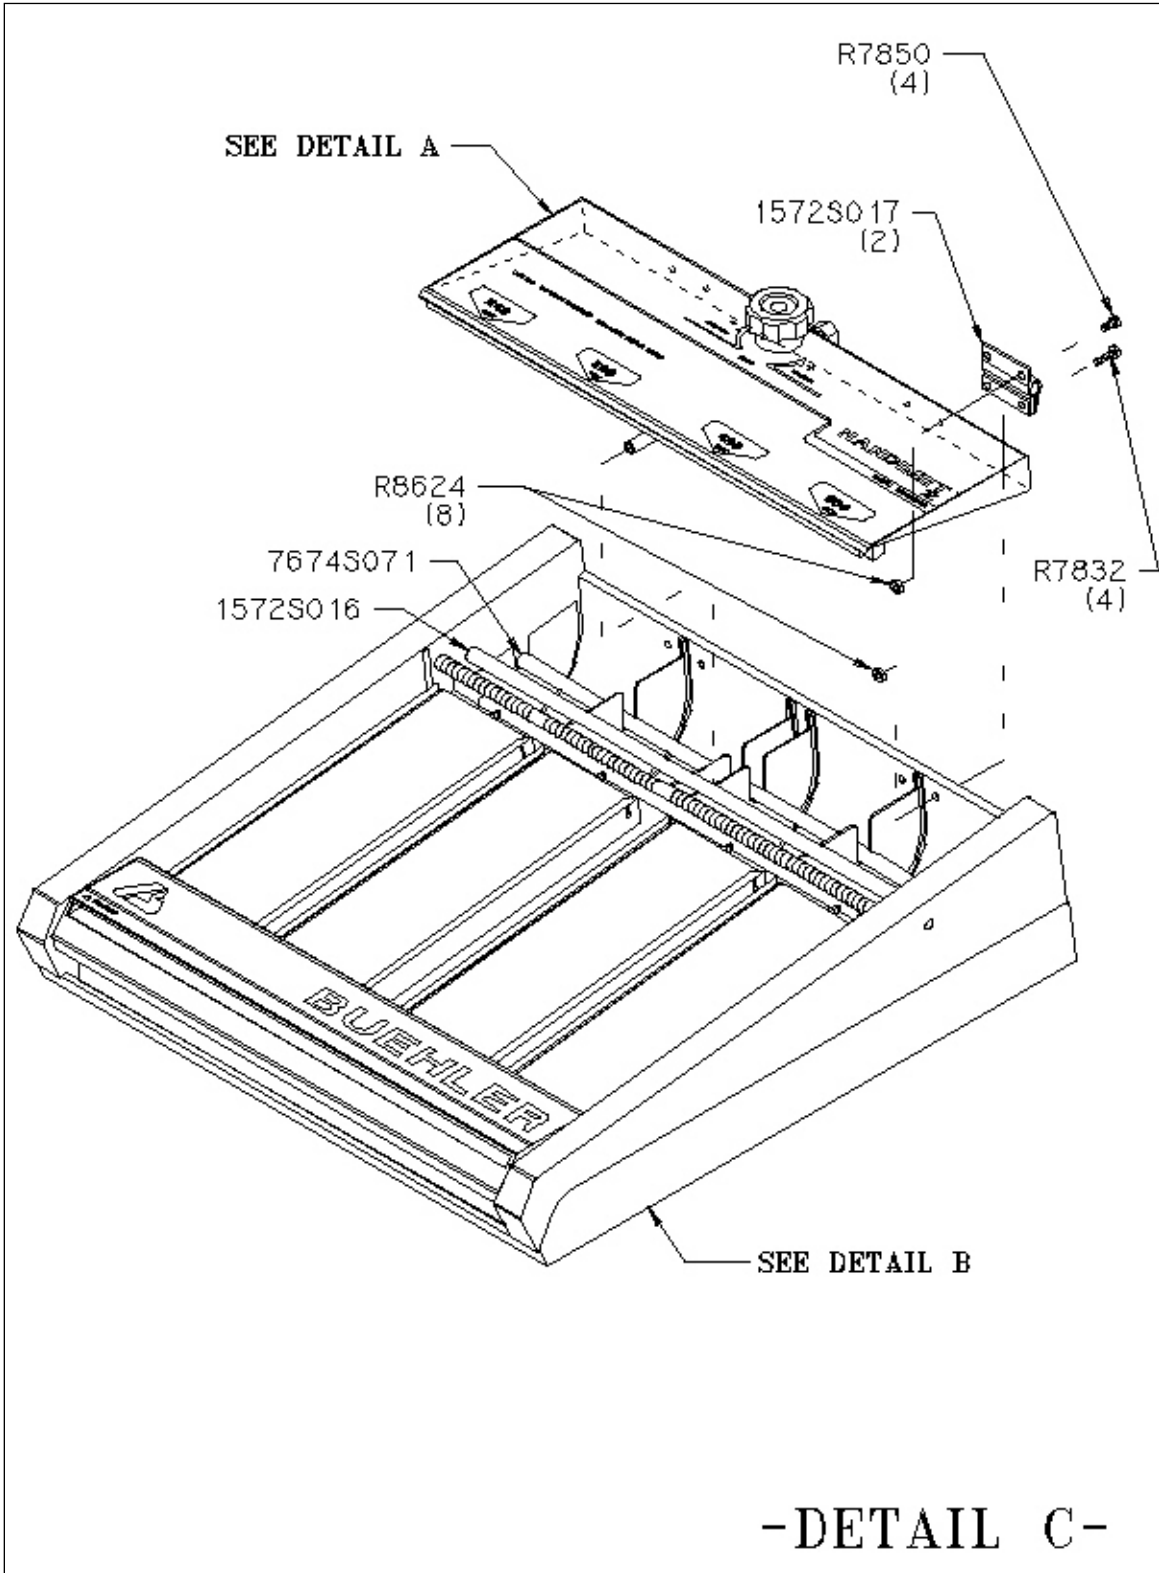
HandiMet 2 Assembly Diagram, Detail C (391572C)
